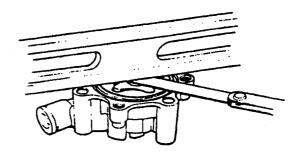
Measuring pump body depth Fig. 8-7 Checking rotor end clearance
